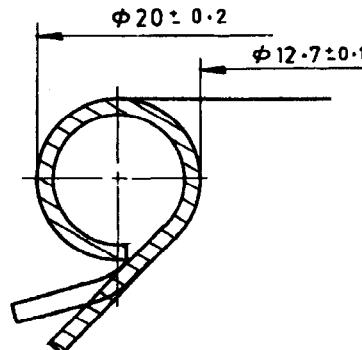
APERTURE DIMENSIONS FOR $\phi 25.4$ TINPLATE AEROSOL CONTAINER
